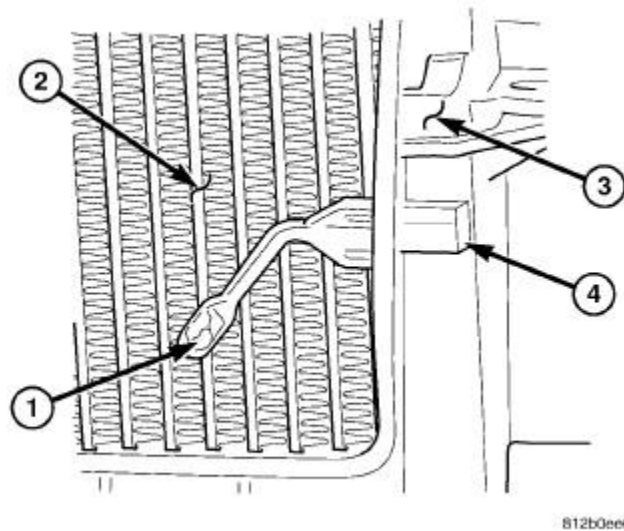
Evaporator Temperature Sensor, A/C Evaporator, HVAC Housing & Connector
